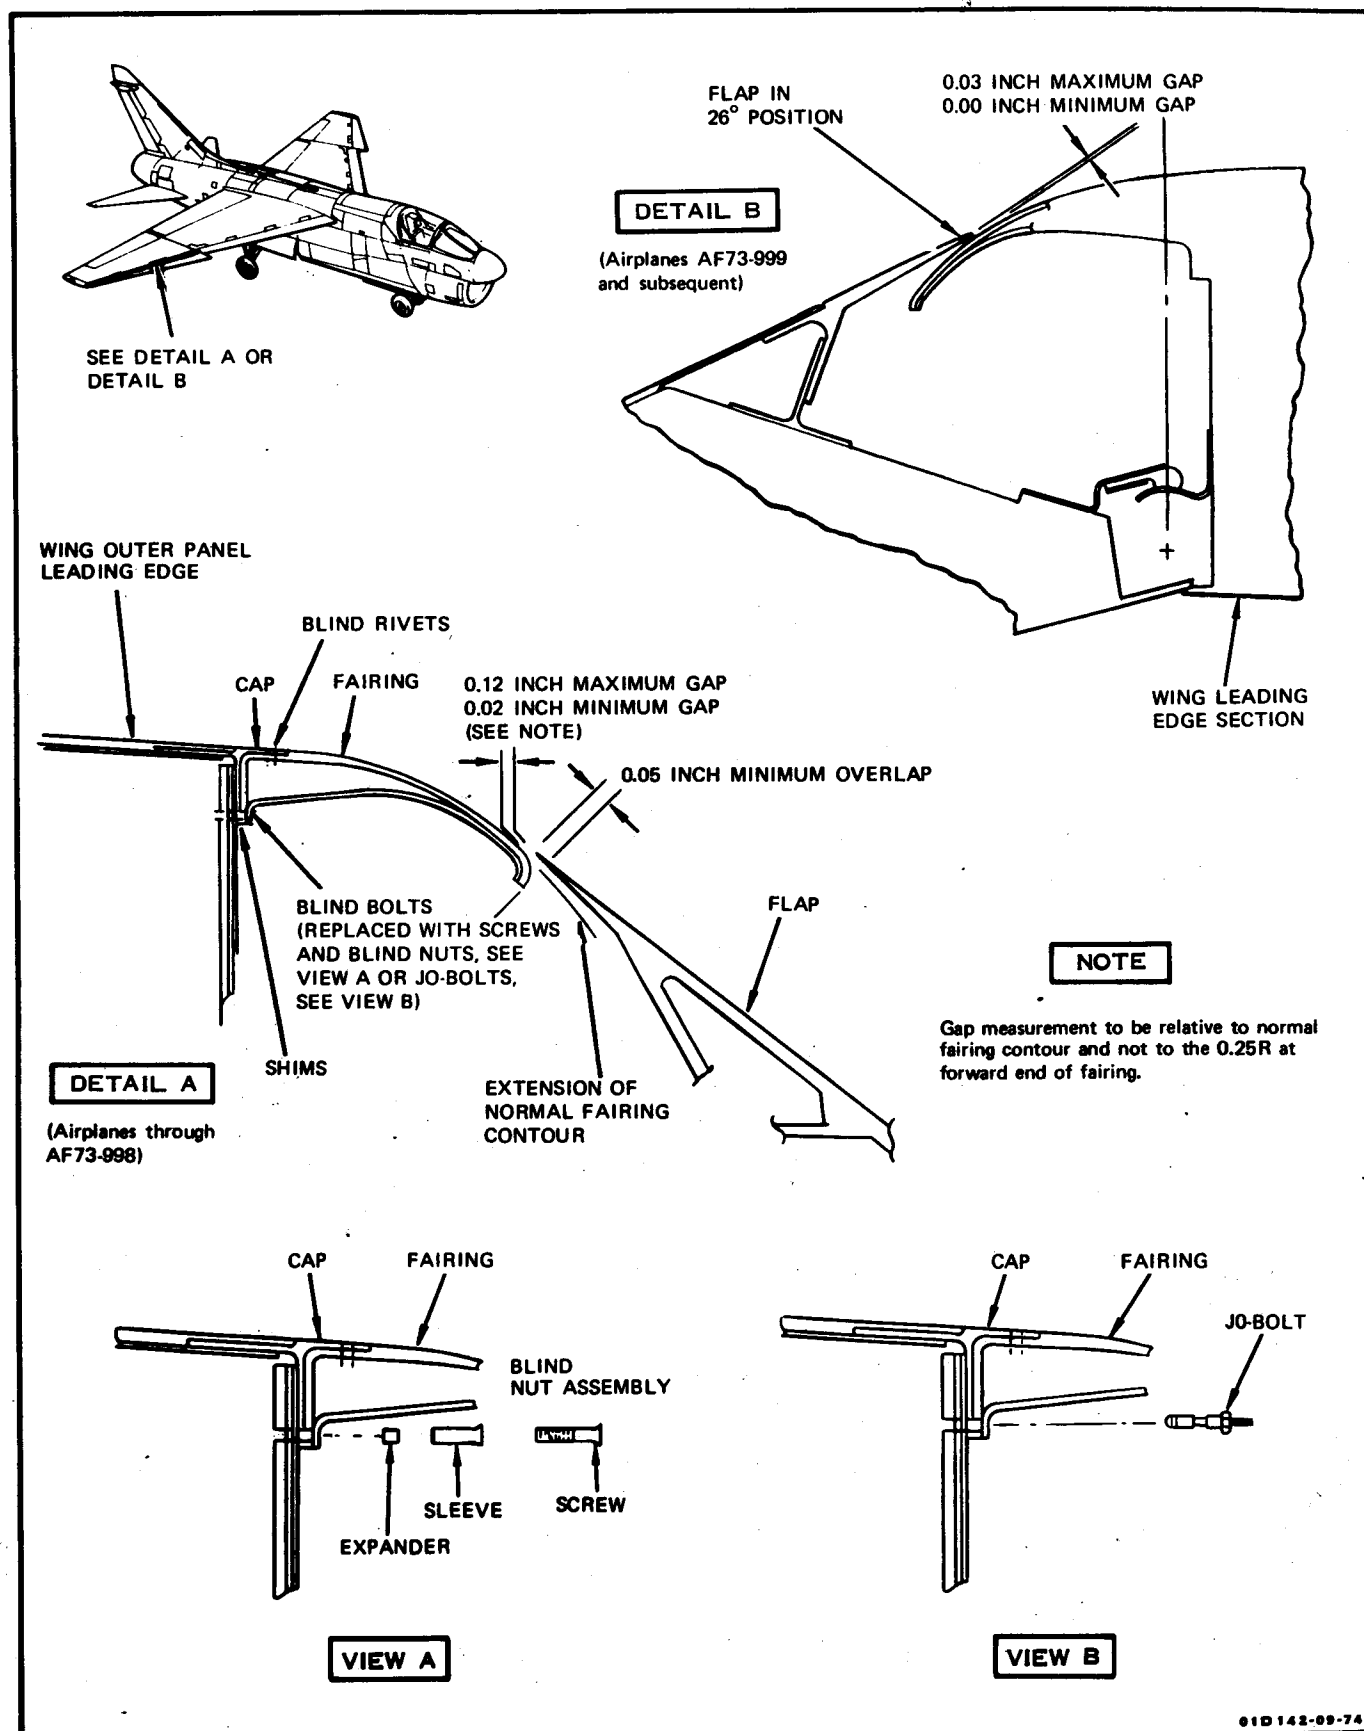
Wing Outer Panel Leading Edge Fairing Removal and Installation
